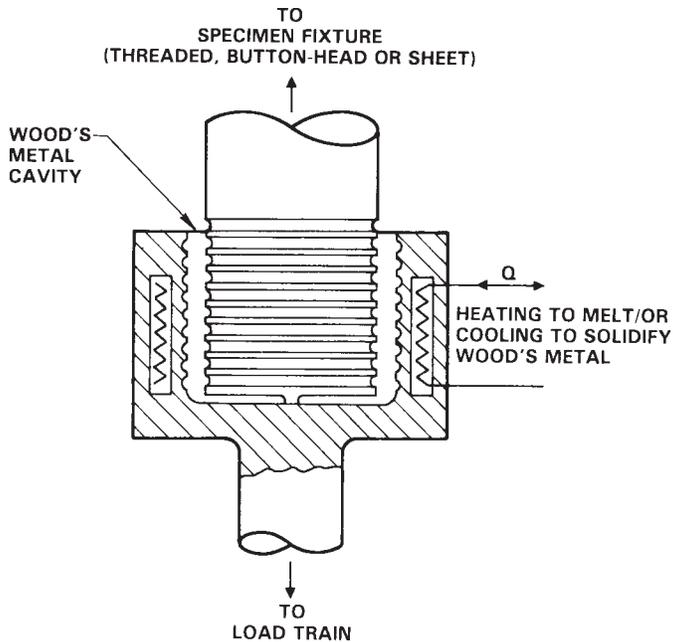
Schematic Examples of Fixturing Techniques For Various Specimen Designs
